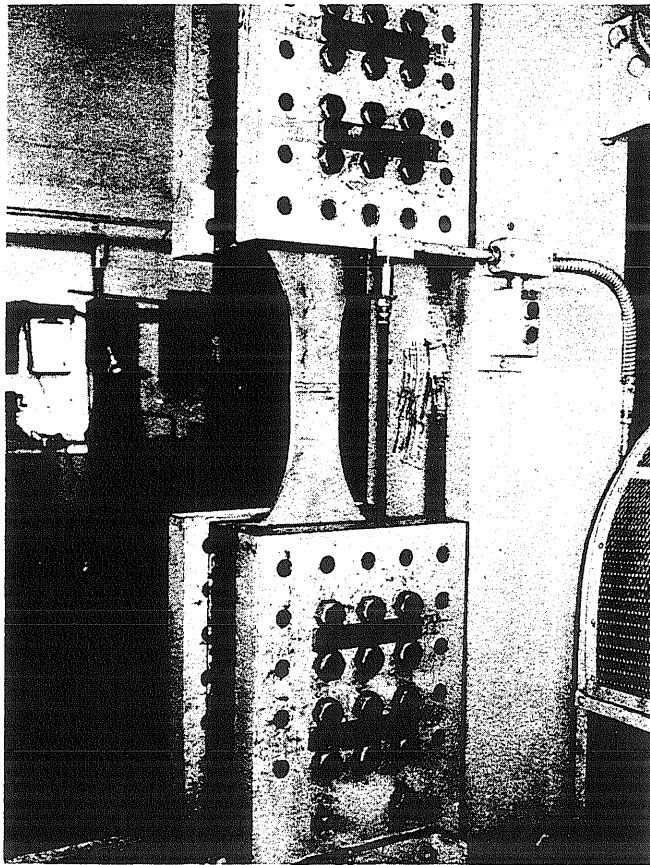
TRANSVERSE BUTT WELDED JOINT
